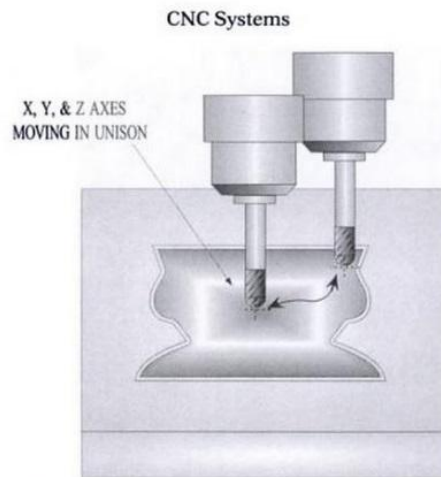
Three axis combination simultaneously on milling machine, [16]
